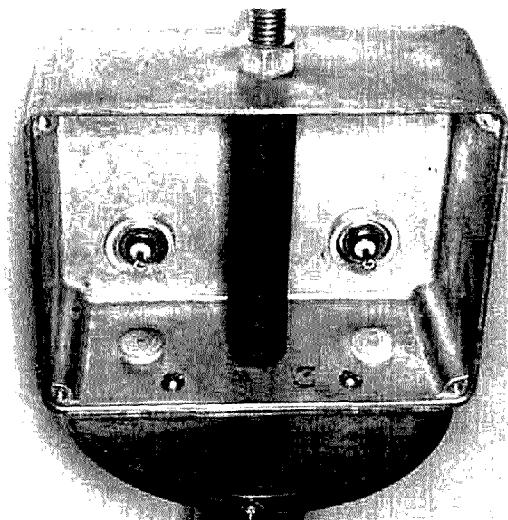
Detail of plastic pipe spacer, threaded rod, locking nut, teflon bushings, coax fittings and how they fit in the box.
